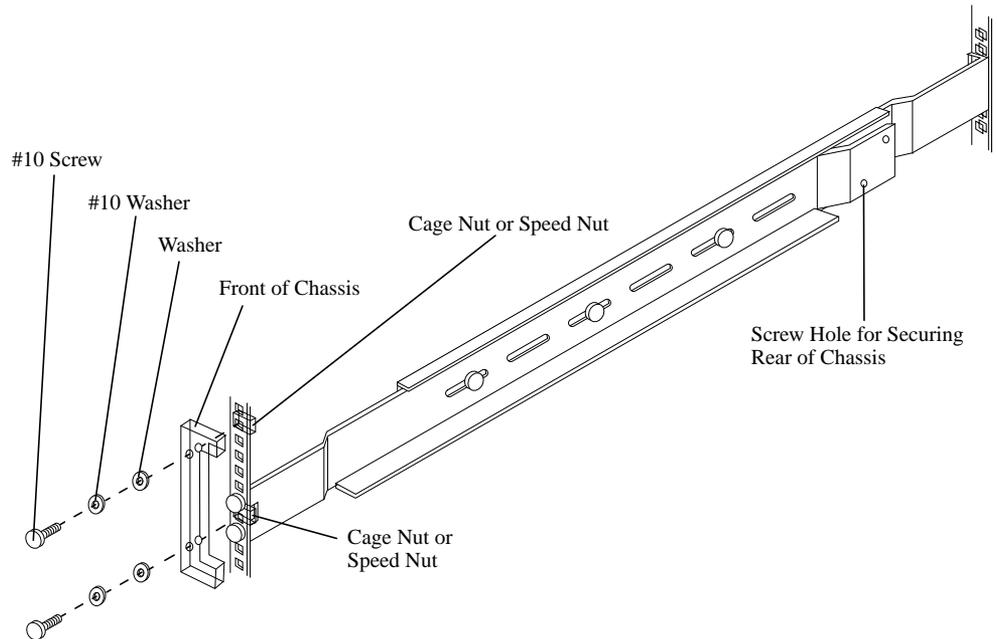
Securing Chassis to Square-Through-Hole Rack (Left Hand)
